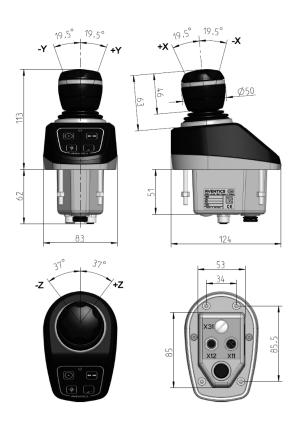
Dimension drawing of Joystick Type 531, R417003030
